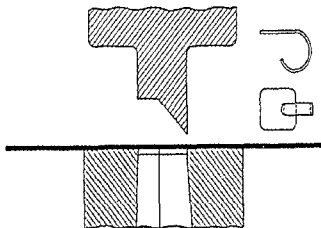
Angular part of punch shears tab of the part and curls it, then the flat part of the punch blanks the completed piece.⁴
